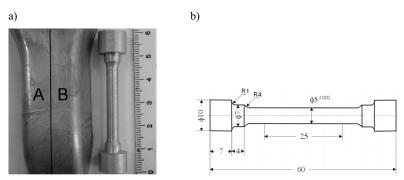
(a) Location of casting samples, (A) location from which samples were taken to evaluate the porosity content and (B) location from which samples were taken to examine the mechanical properties. (b) dimensions of samples for testing mechanical properties (in mm)
